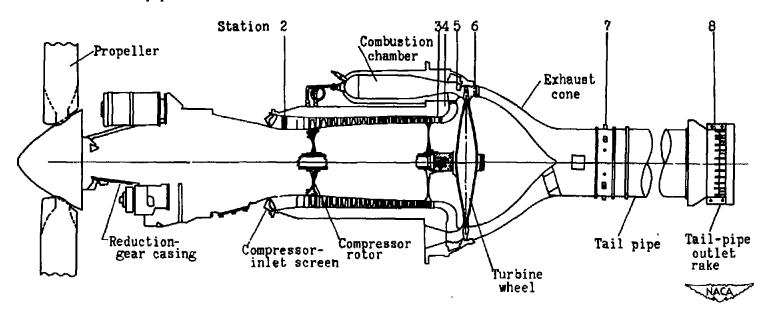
Side view of axial-flow gas turbine-propeller engine showing location of measuring stations.
